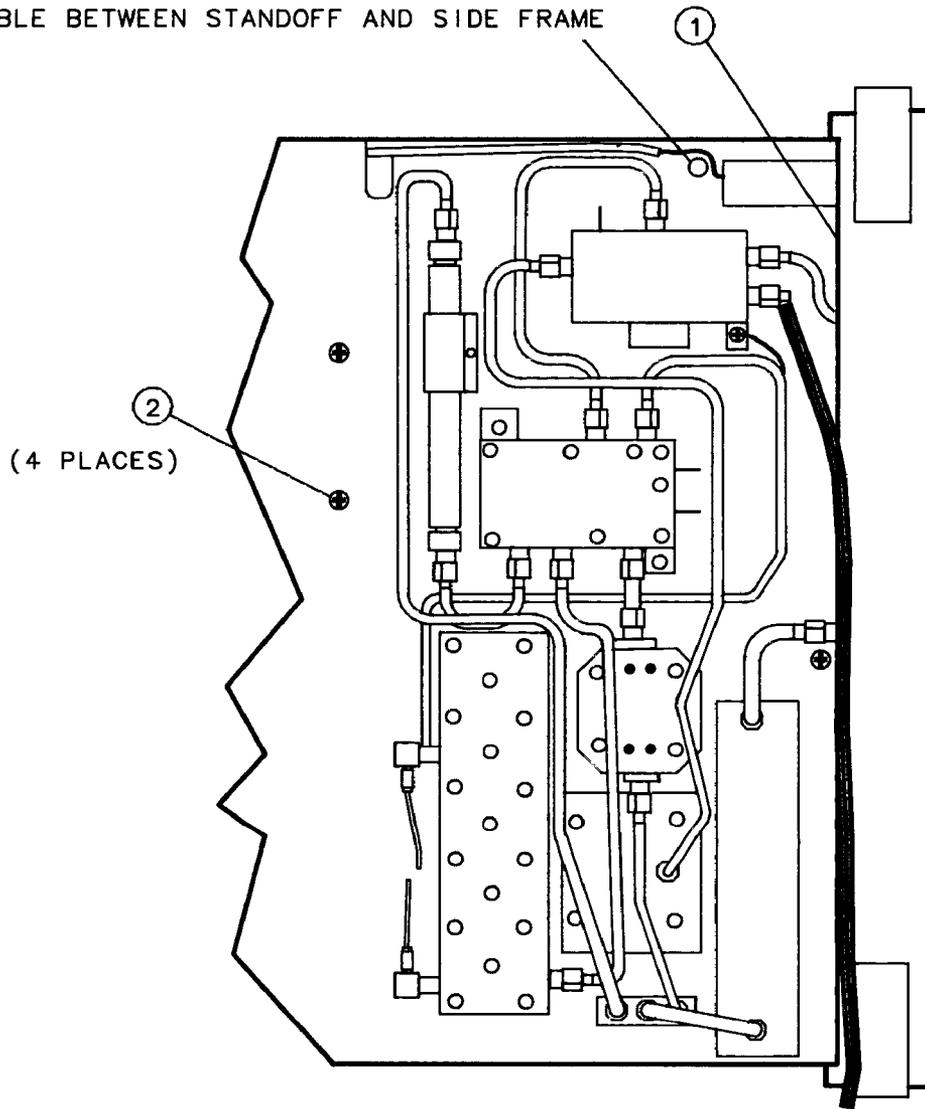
Line Switch Mounting Screw and Cable Dress
